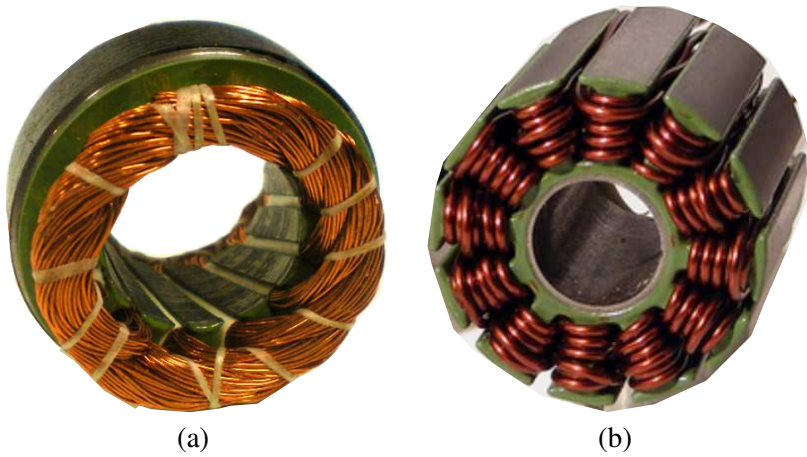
Demonstration of the distributed winding machines (a) and concentrated winding machines (b) [26].
